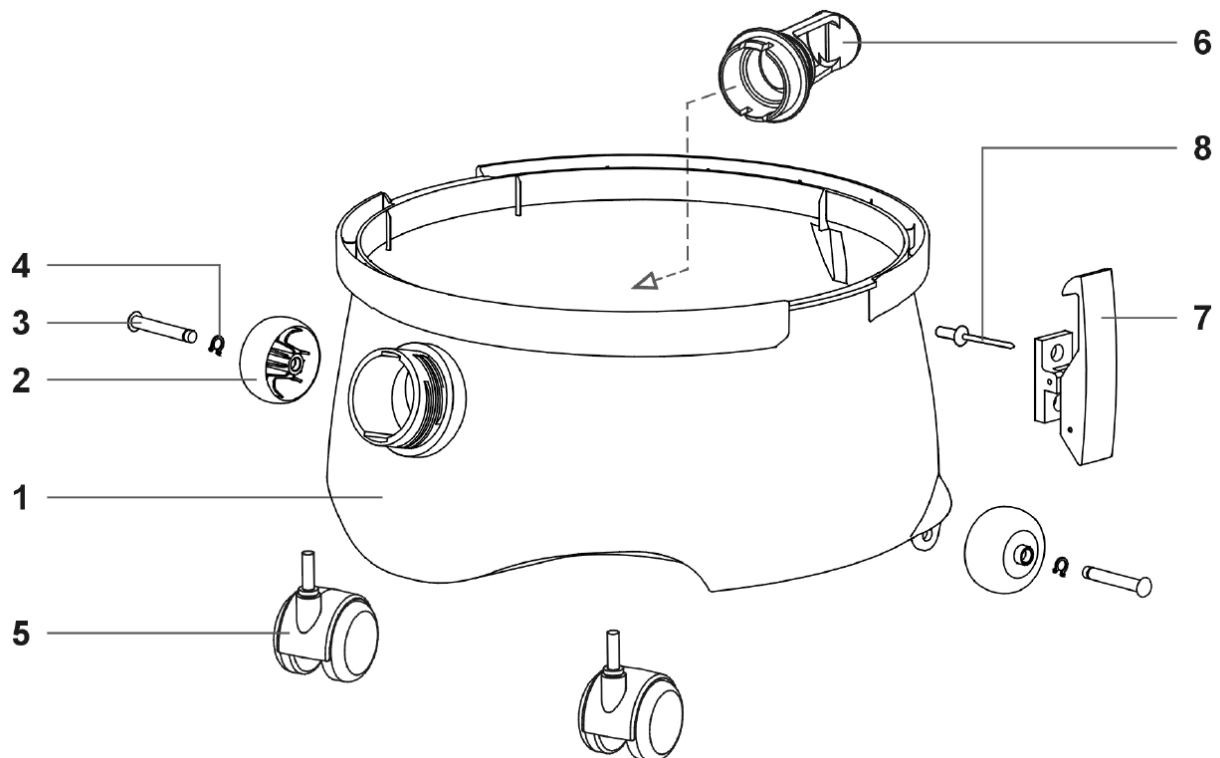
Spare parts drawing 3, base frame, flexCAT 116 Q
